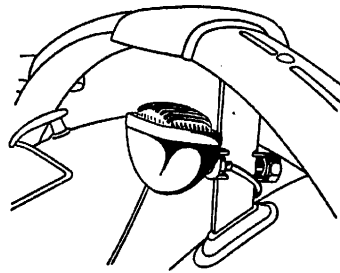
Reversing lamp with clamping holder LEBE 34 L 5 Z for older types of Volkswagen
